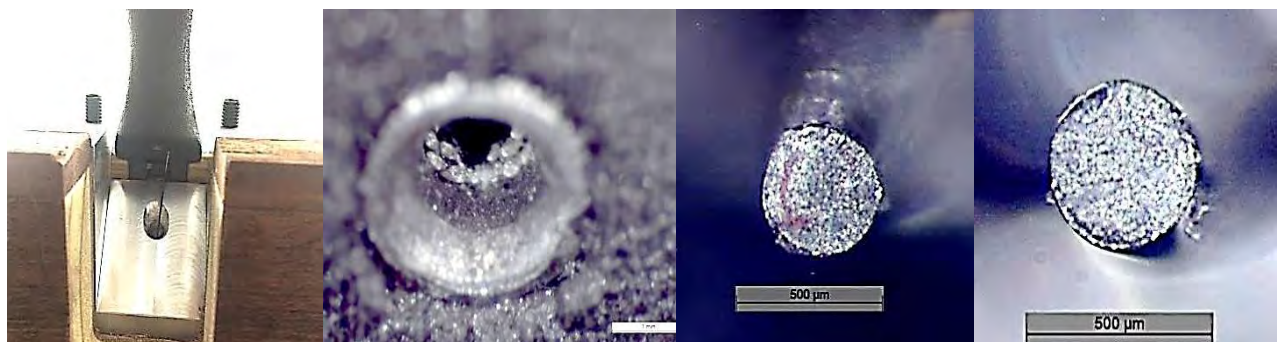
Specimen 3: Actuating wire failure at MCP joint (left), wear of HHS tubing prox. phalanx (centre left), and prox. (centre right) and distal (right) fracture surfaces of the actuating wire.
